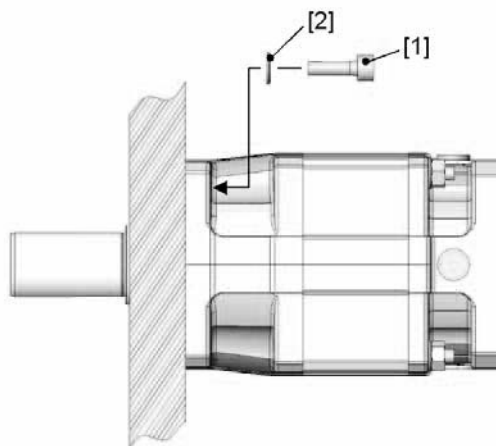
Installing the PS.C.. planetary servo gear unit in the machine
